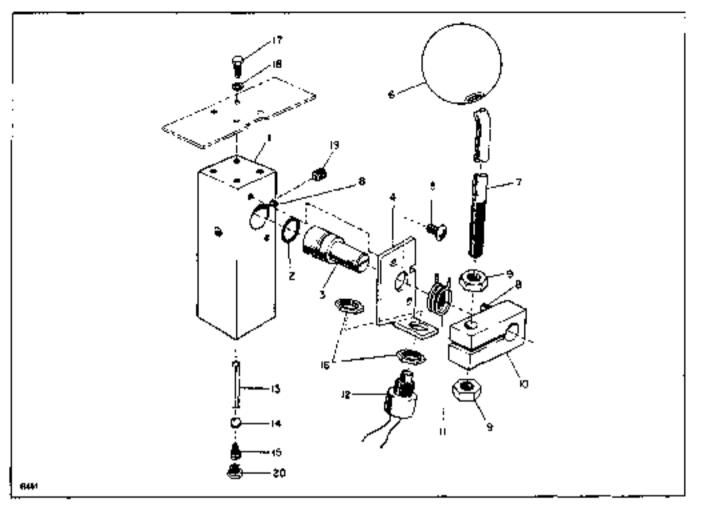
Lift Control Valve Assembly 504216-02 - Standard 503209 - Cold Conditioning
